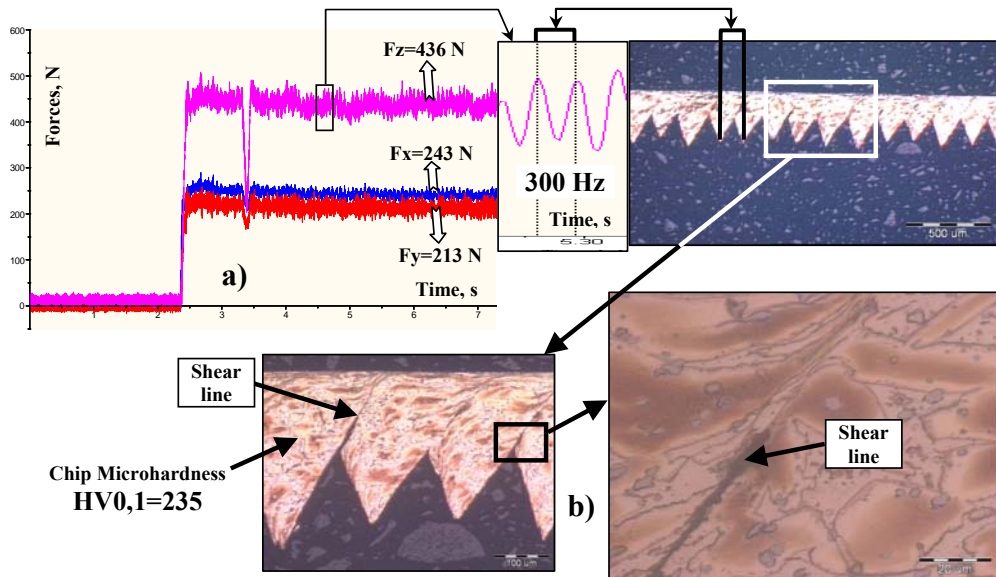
Cutting forces measuring results and chip shape exploration (MQL machining)
